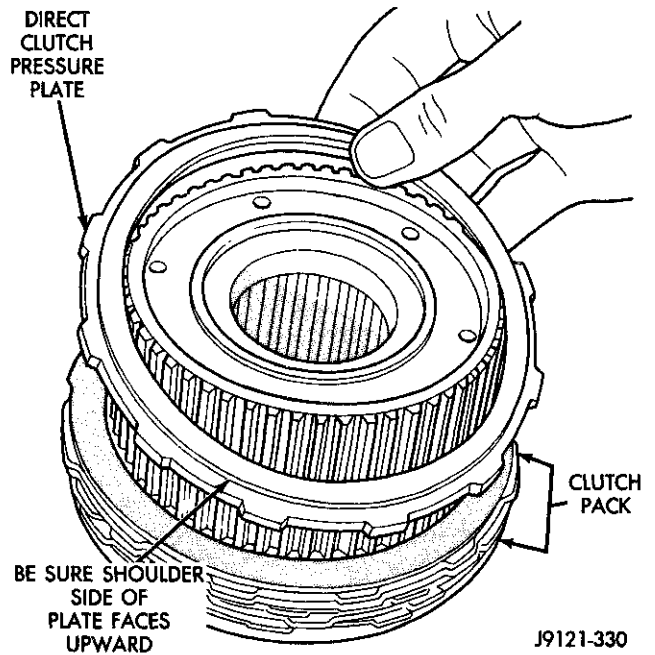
Correct Position Of Direct Clutch Pressure Plate
